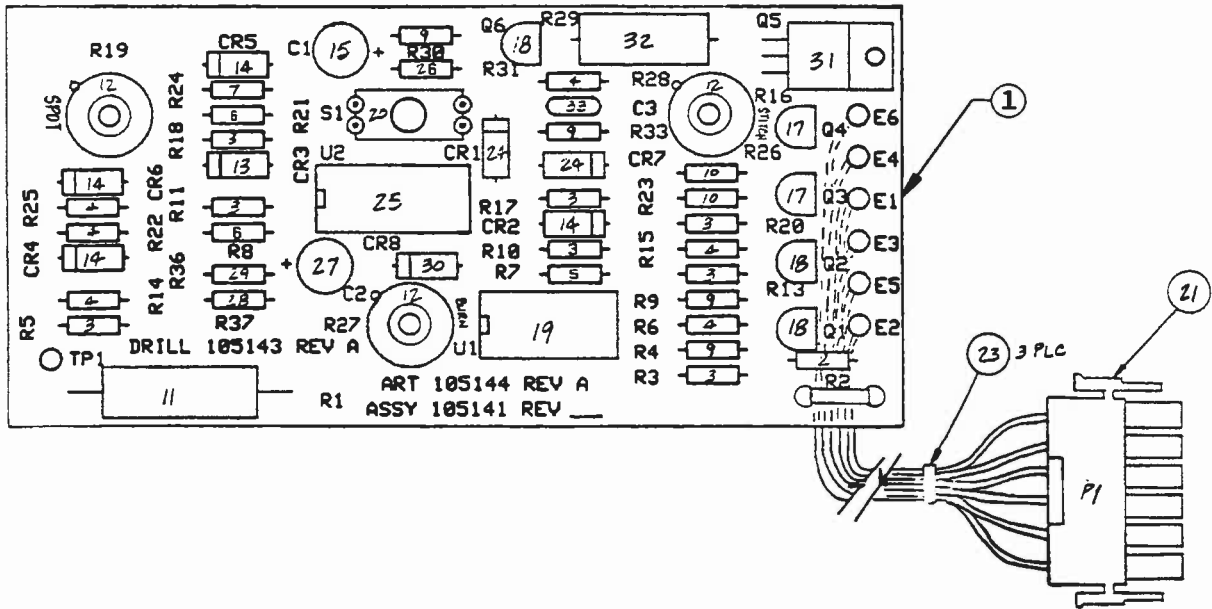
, PCB, WP1 SP/ST/BB Assembly, PD/M
